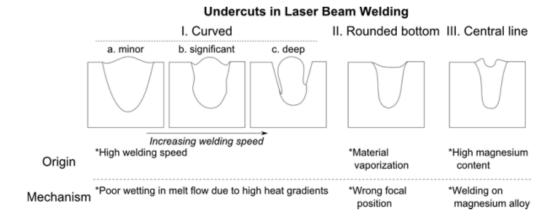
b.2: Types of undercuts specific to the laser beam welding process
